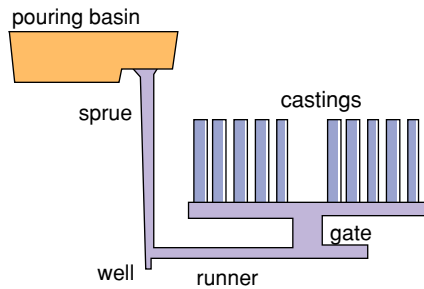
The gating system, which brings the molten metal to the mold cavity, is illustrated in its simplest form. The design of this system is critical in the introduction of clean metal to the mold cavity.
